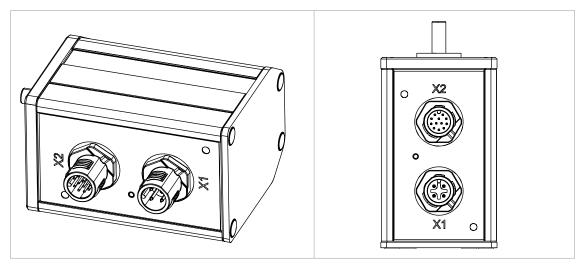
Isometric view (left) and connector view (right) for radial cable exit
